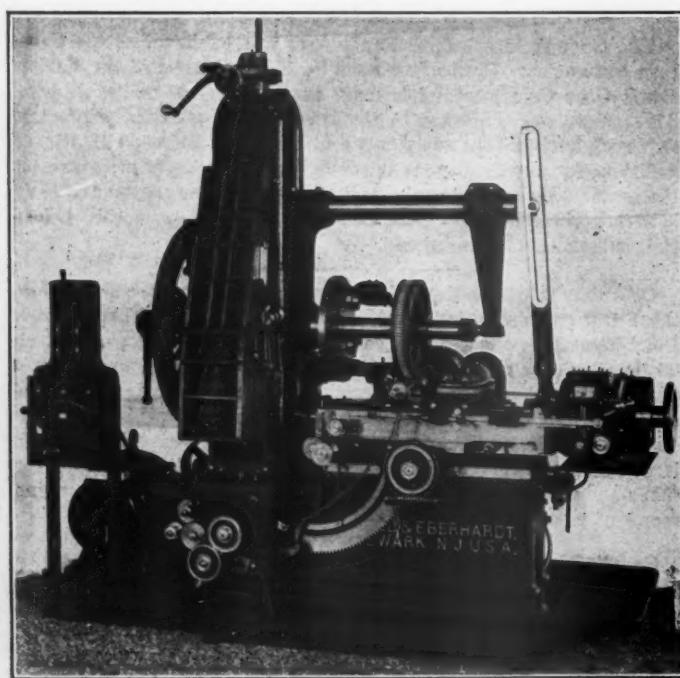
AUTOMATIC GEAR CUTTING MACHINE, WITH SELF-CONTAINED MOTOR DRIVE.—GOULD & EBERHARDT.
